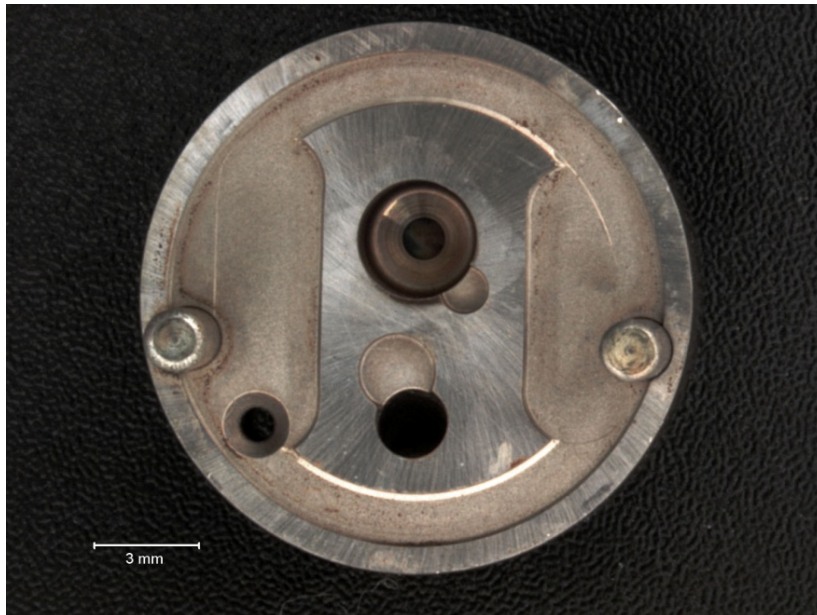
AF8646 ATJ/JP-8 Blend, Control Valve Plate (Bottom)
